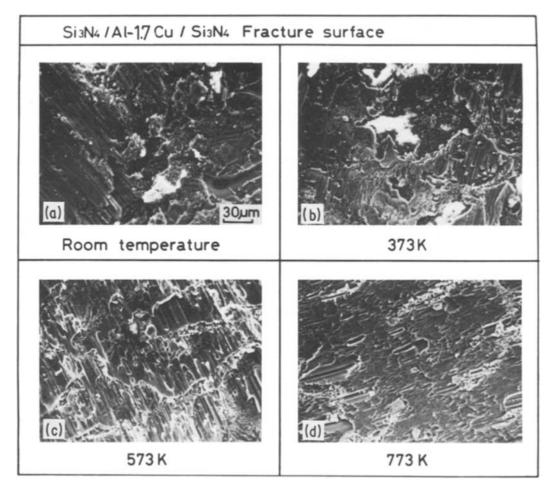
Change in fracture structure of  $Si_3N_4$  joints brazed at 1373 K for 3.6 ksec using Al-1.7 at % Cu alloy filler with shear testing temperature. (a) Room temperature, (b) 373 K, (c) 573 K, (d) 773 K.
